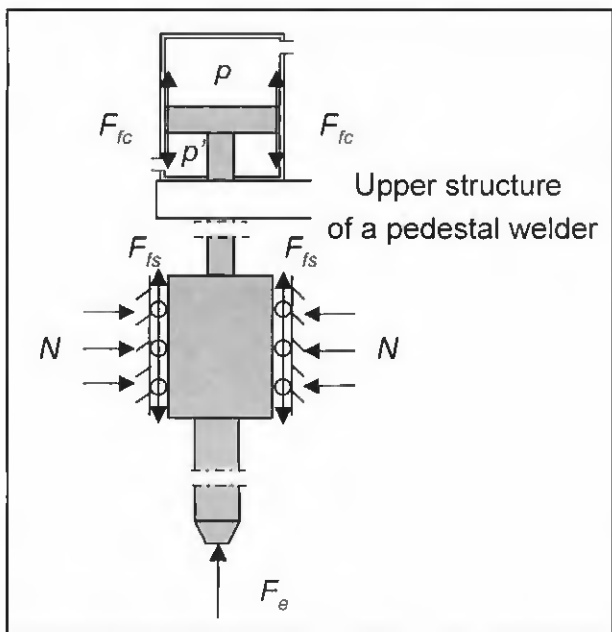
Friction forces in the upper structure of a pedestal welding machine.
